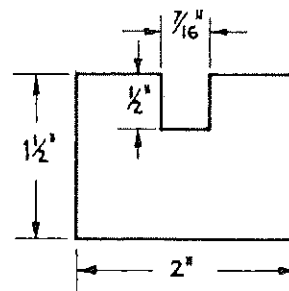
LATHE TOOL HONING JIG & HEIGHT SETTING GAUGE
